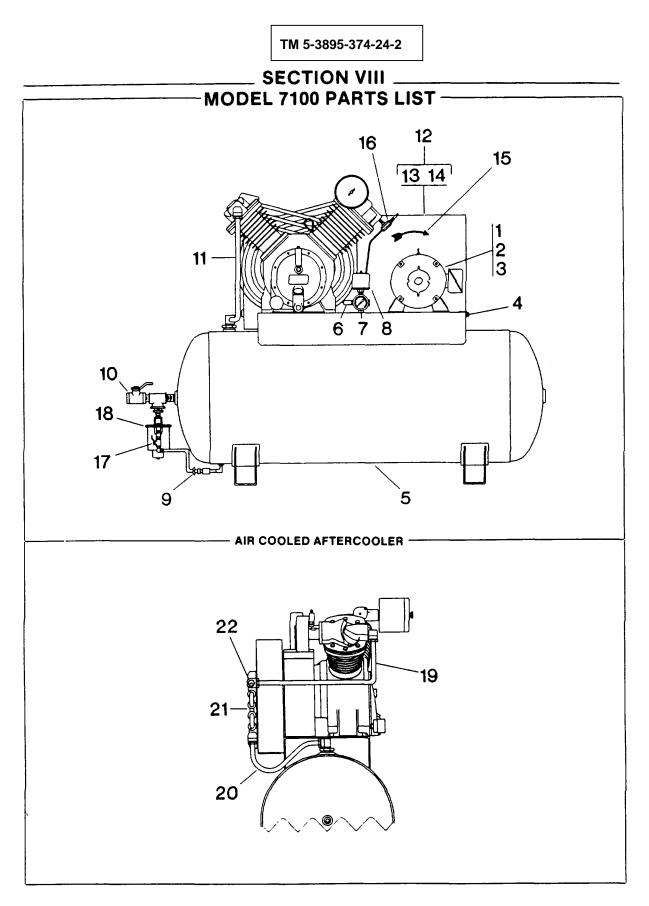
COMPRESSOR DRIVE, AIR RECEIVER, AND ACCESSORIES.
